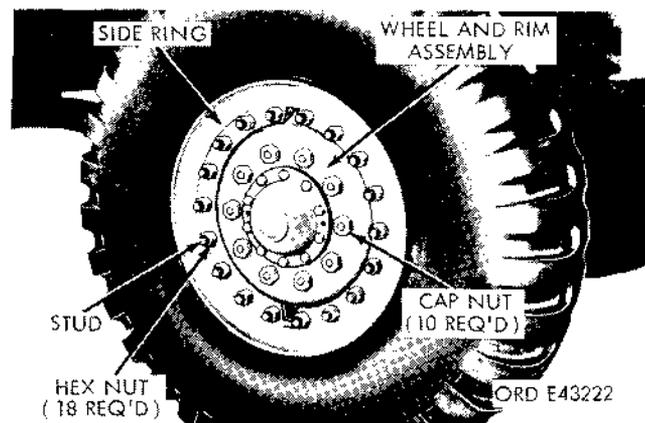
Wheel and tire assembly with bolted-on type side ring (14.00x20 tires).
